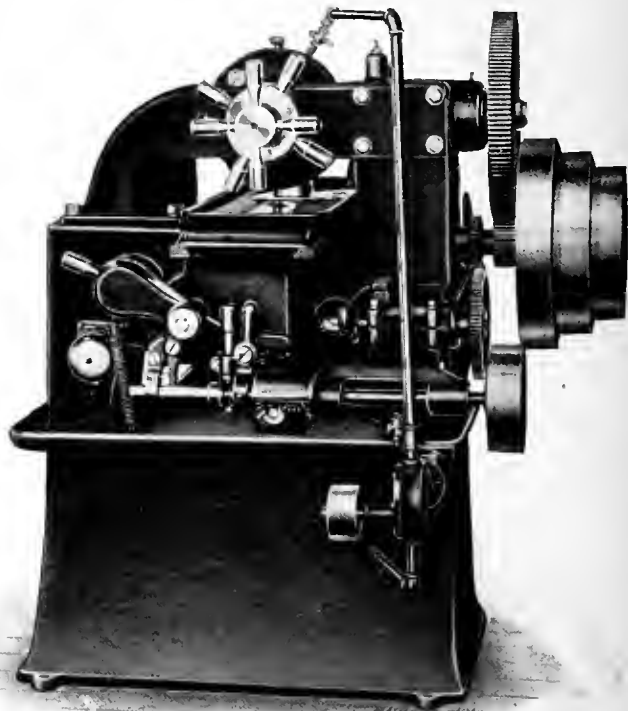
Rear View of Gear Generating Machine, showing Feed Mechanism.
